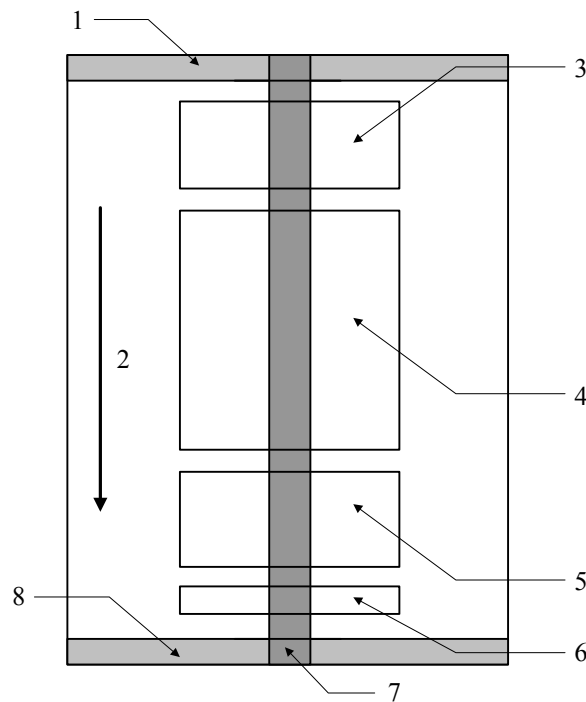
(continued) Location of Test Specimens ⁽⁸⁾
